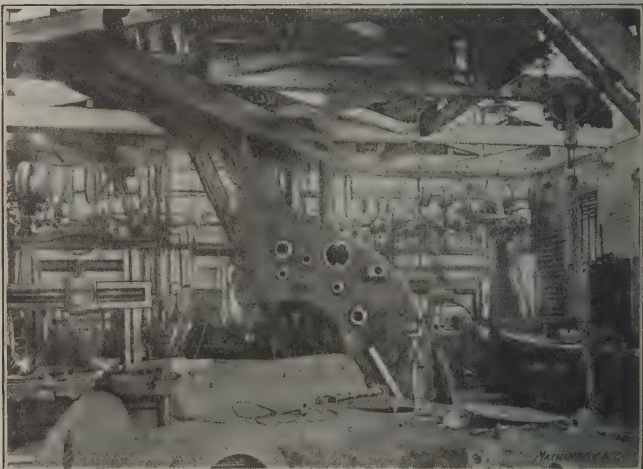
Frames of Car-wheel Borers under Gib Cranes. Radial Drilling Machine in Background at Work on Casting.
